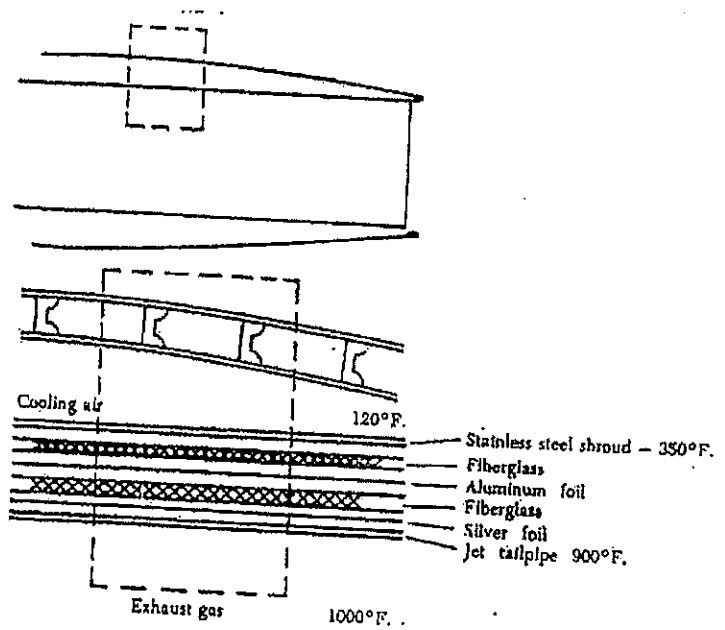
Insulation blanket with the temperatures which would be obtained at the various locations shown.
